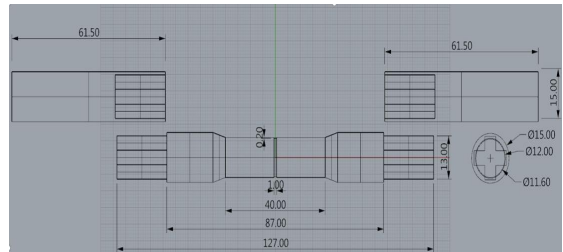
Shape and dimension of 0.2mm(R) specimen
